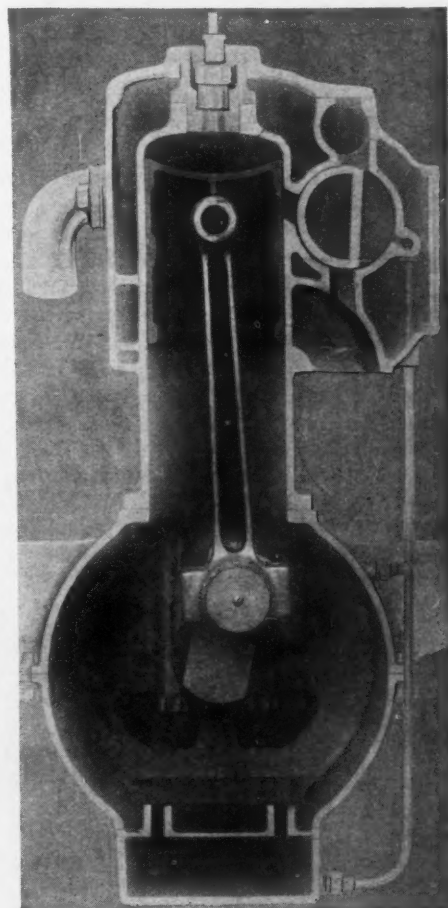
HENRIOT ROTARY-VALVE MOTOR
